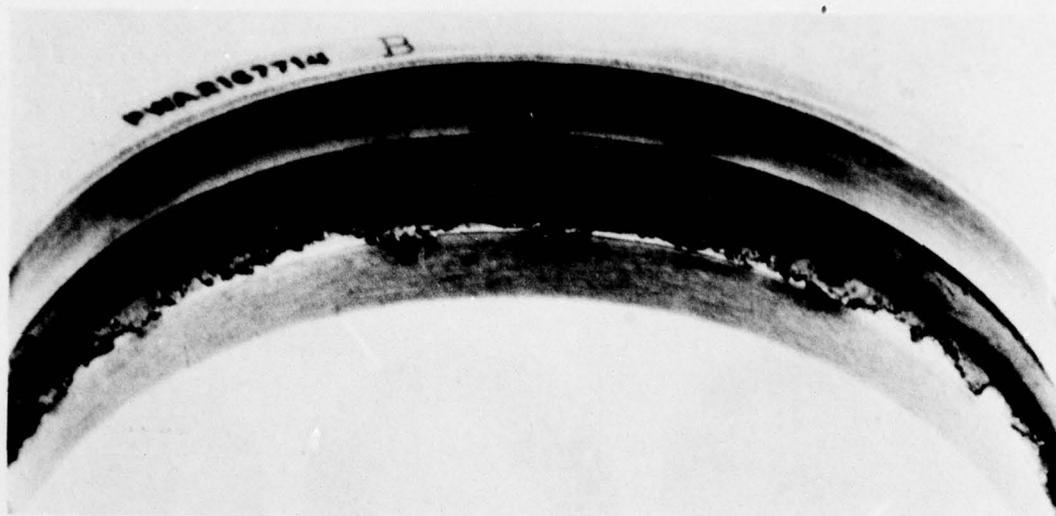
Outer Race of M-50 Bearing After Oil Shutoff Test
